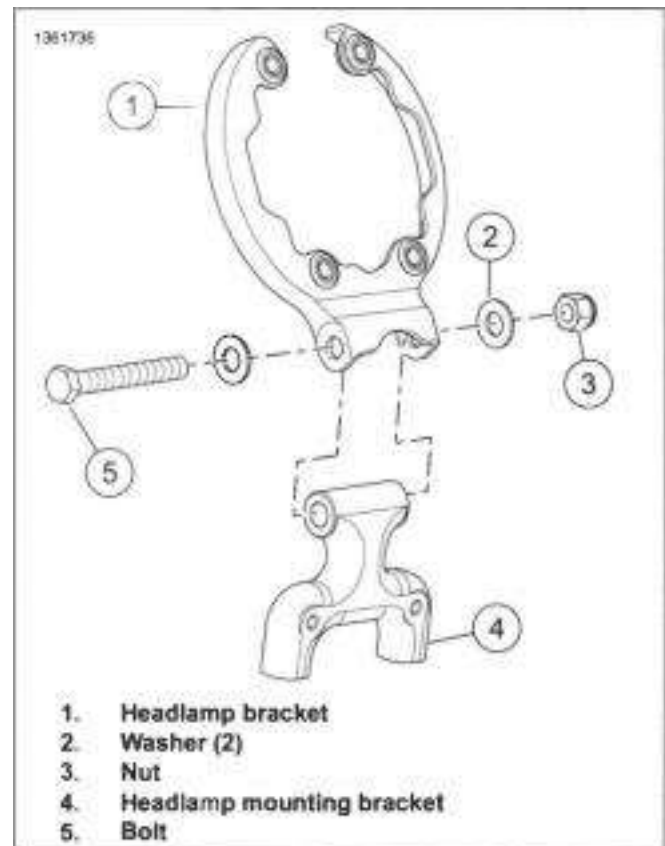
Headlamp Bracket Bolt, Washers, Nut
